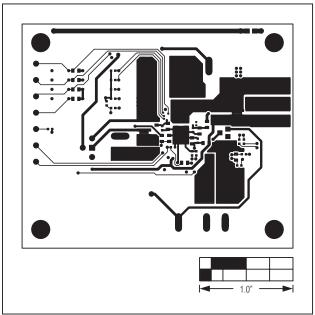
MAX17019 EV Kit PCB Layout—Solder Side
